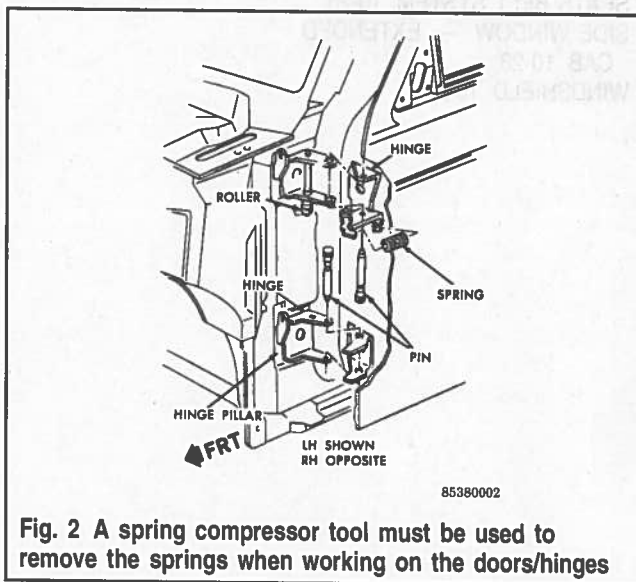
A spring compressor tool must be used to remove the springs when working on the doors/hinges
